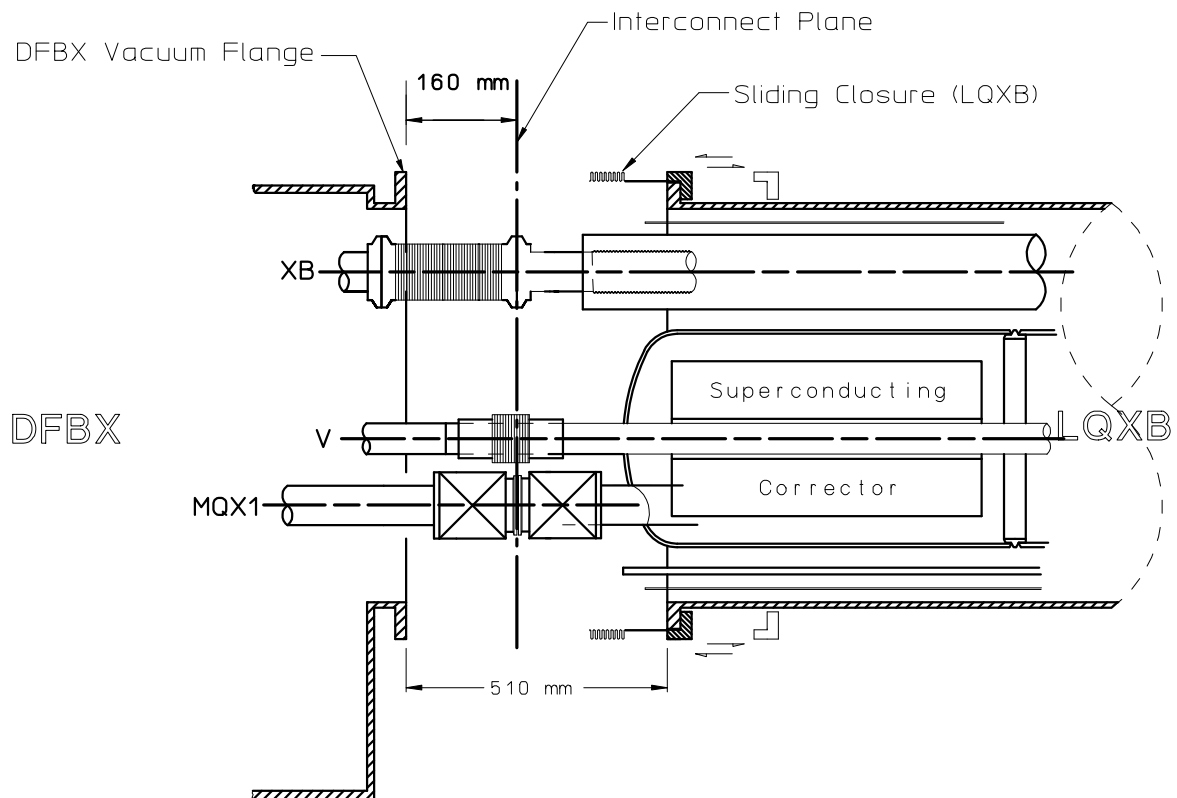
DFBX-LQXC Connection Layout for MQX1, V, and XB
